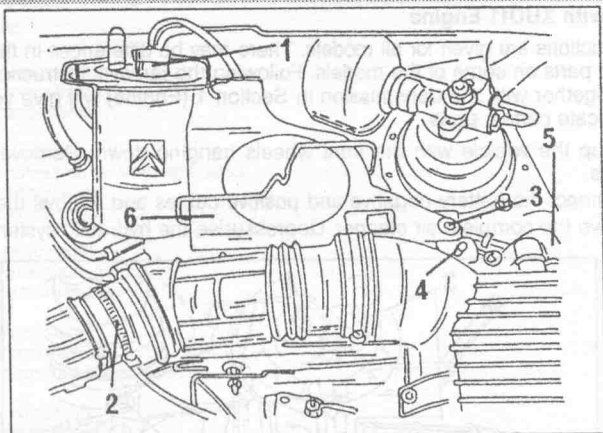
Details for the removal of the fluid reservoir, also showing where the air cleaner attachments are located. The filter head is inserted into the special container; the reservoir is sealed off with the cover.
